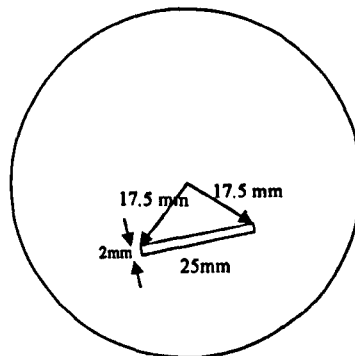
The position of the simulated 25×2 mm planar type defect within the cylindrical test specimen.
